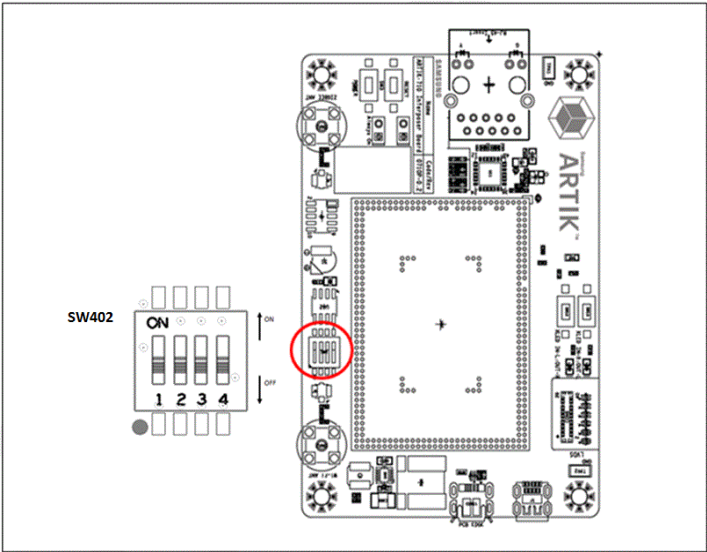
Location of Boot Configuration DIP Switches on the Interposer Board
